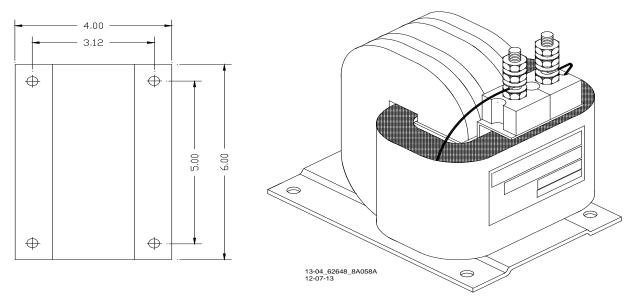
62648/8A065A Battery Choke With Mounting Dimensions
